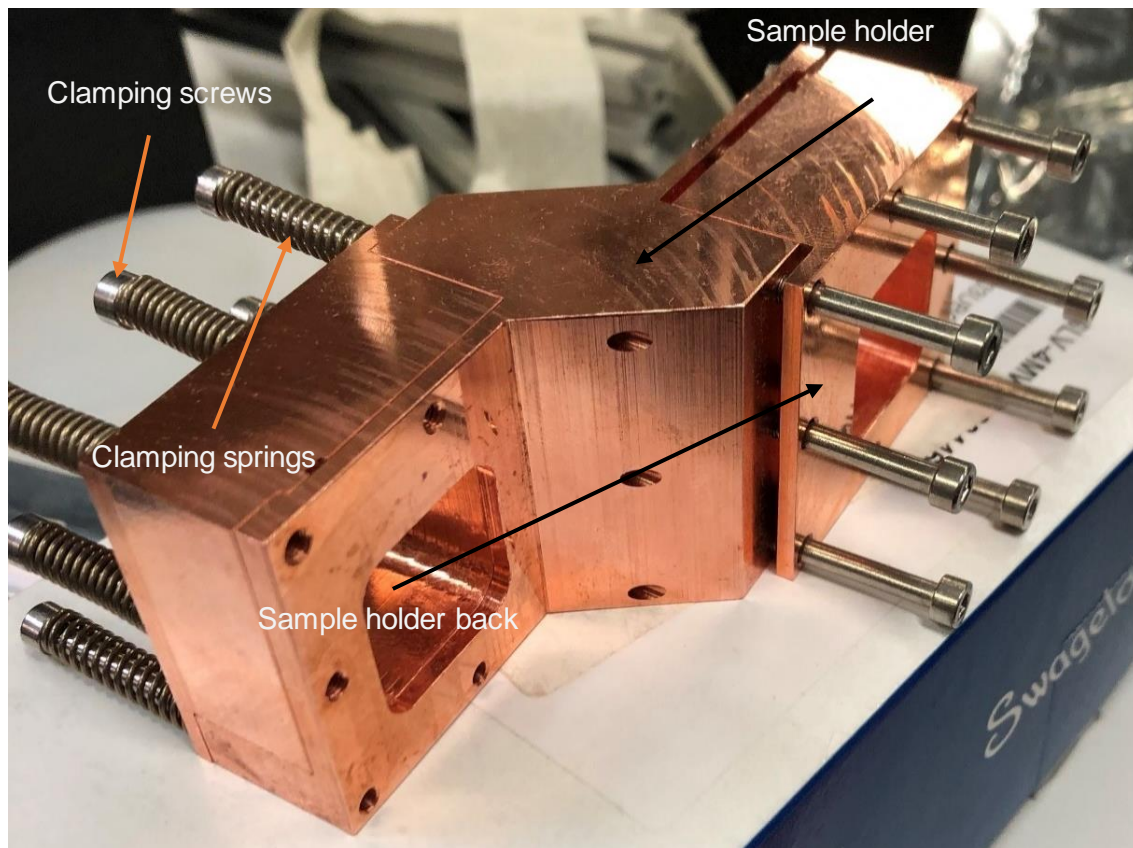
The sample holder fabricated and assembled without mount, one side with springs, one side without.
